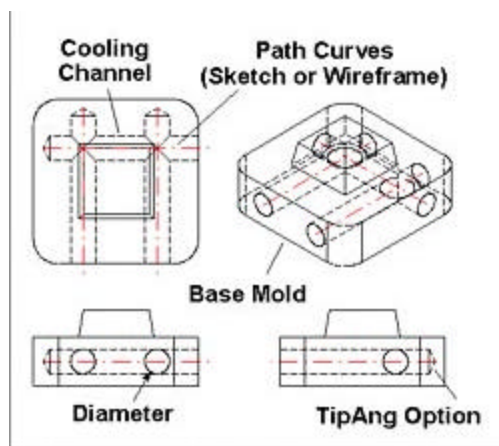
VX Overdrive™ V5 Mold Edition automates the design of cooling channels in core and cavity blocks.
